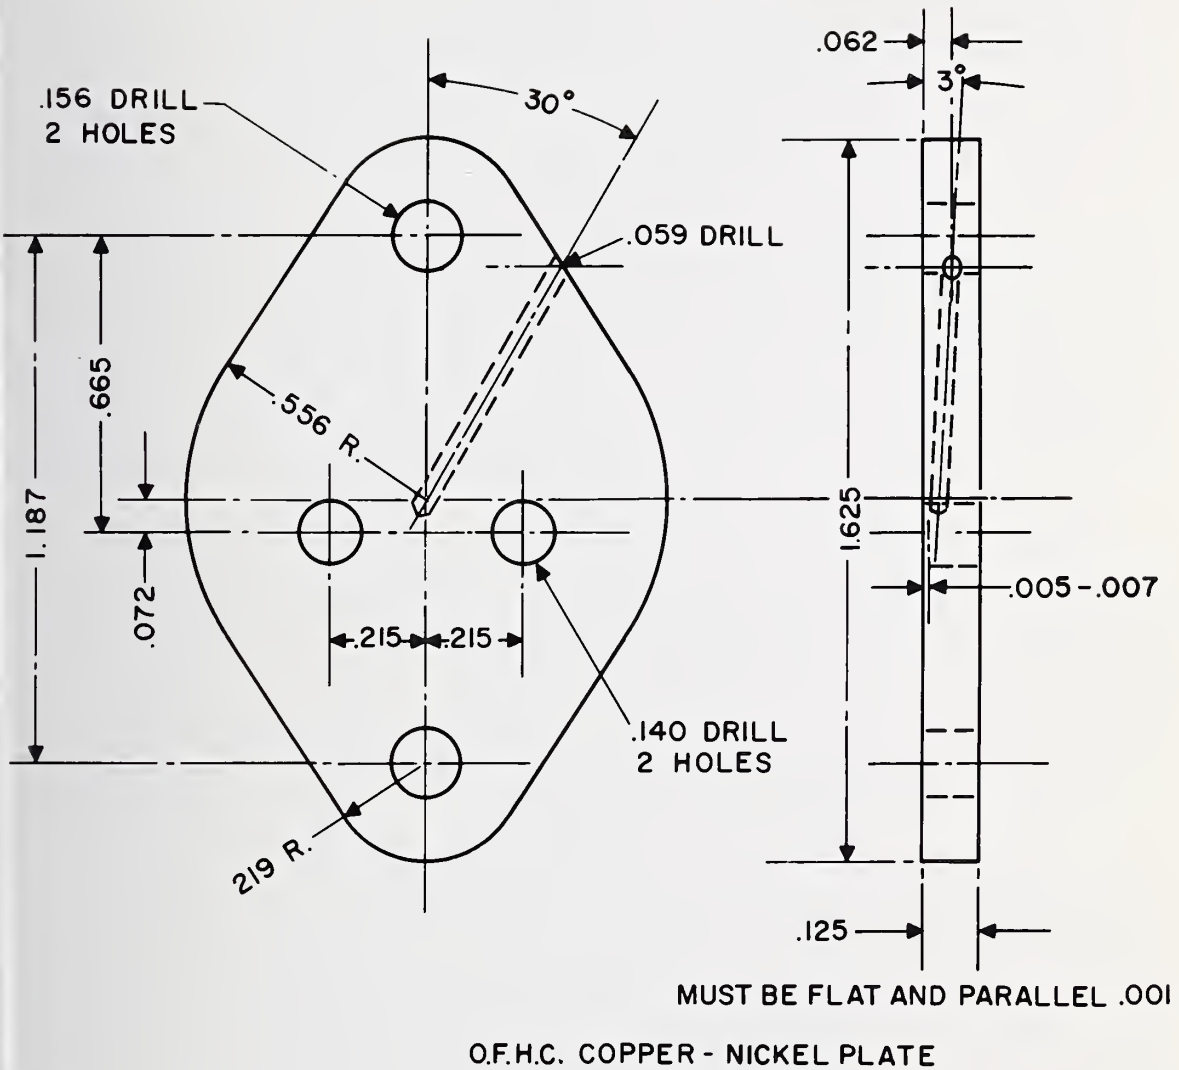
Typical mounting washer for a TO-3 encased transistor. (All dimensions in inches)
